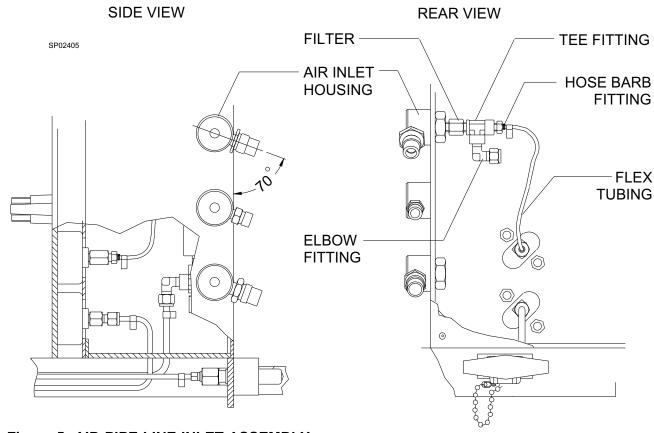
AIR PIPE LINE INLET ASSEMBLY
